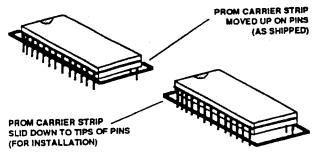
PROM and PROM carrier strip. Place PROM on level surface with pins down. Carefully slide carrier strip toward ends of pins.
